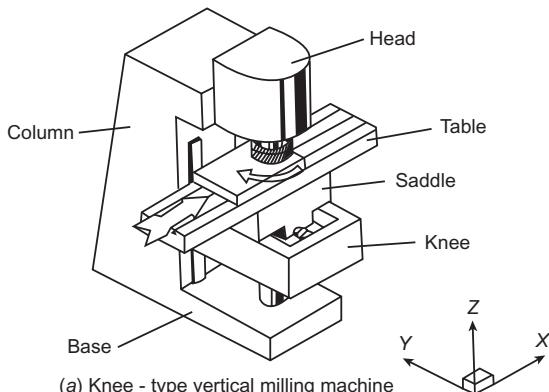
Knee-type vertical milling machine for face milling. Courtesy: G. Boothroyd, *Fundamentals of Metal Machining and Machine Tools*, McGraw-Hill Book Company, New York, 1975.⁹
